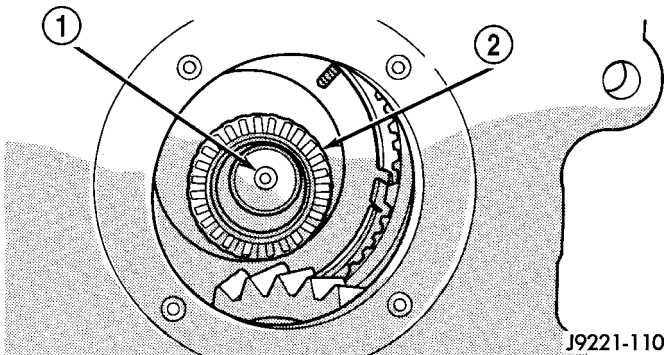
MAINSHAFT AND GEARTRAIN IN CASE
